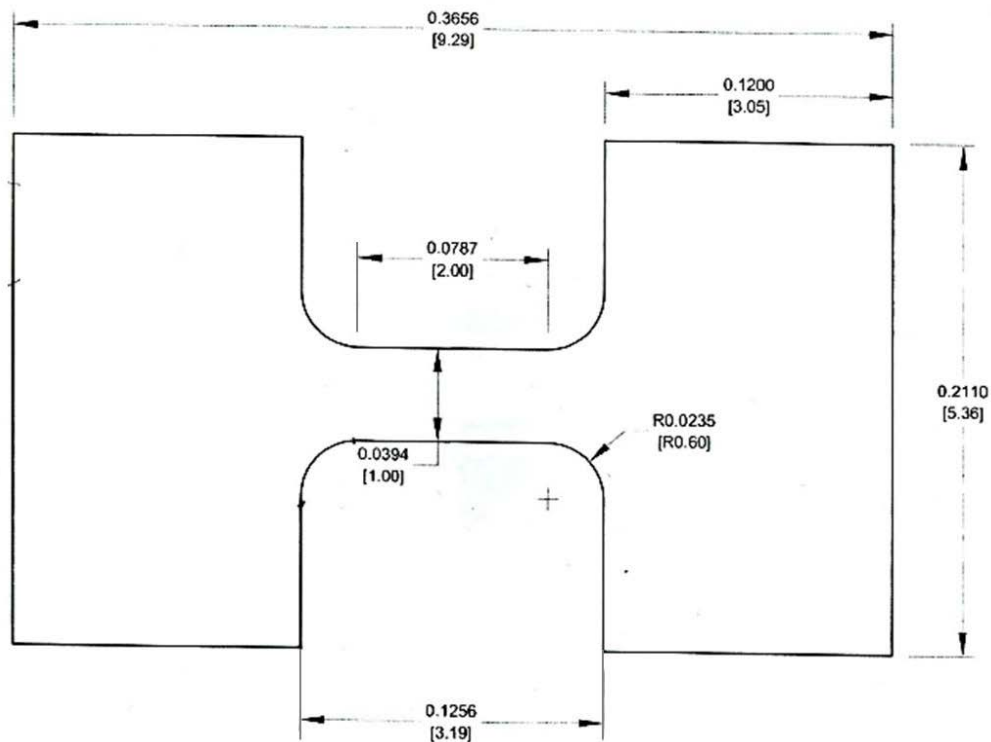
Mini-tensile Specimen Dimensions, inches [mm]
